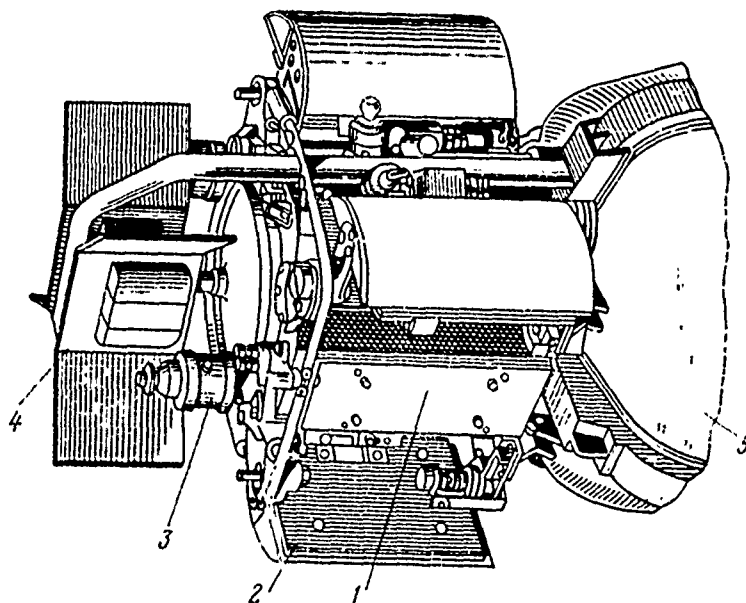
Construction of a nuclear reactor on thermal neutrons: 1 - housing; 2 - regulating rods; 3 - electric drive of the rod; 4 - pump; 5 - shield.
